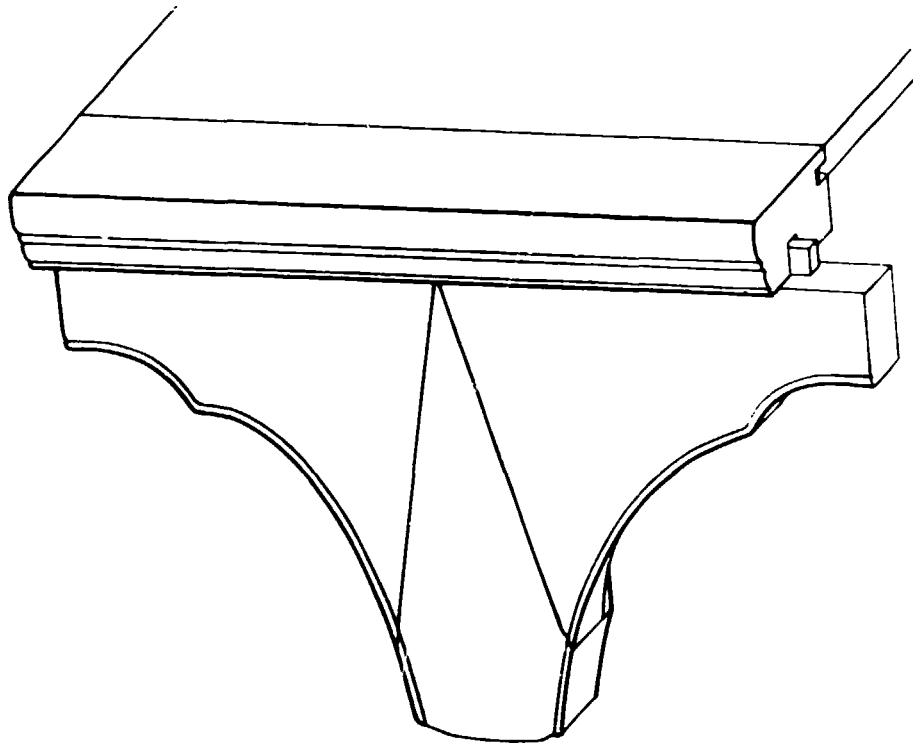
Shoulder inserted joint for "an" shaped tables.
